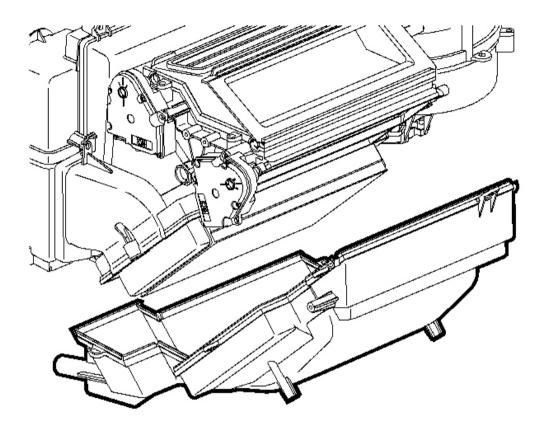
Heater Core & Pipe Seal Courtesy of GENERAL MOTORS CORP.
